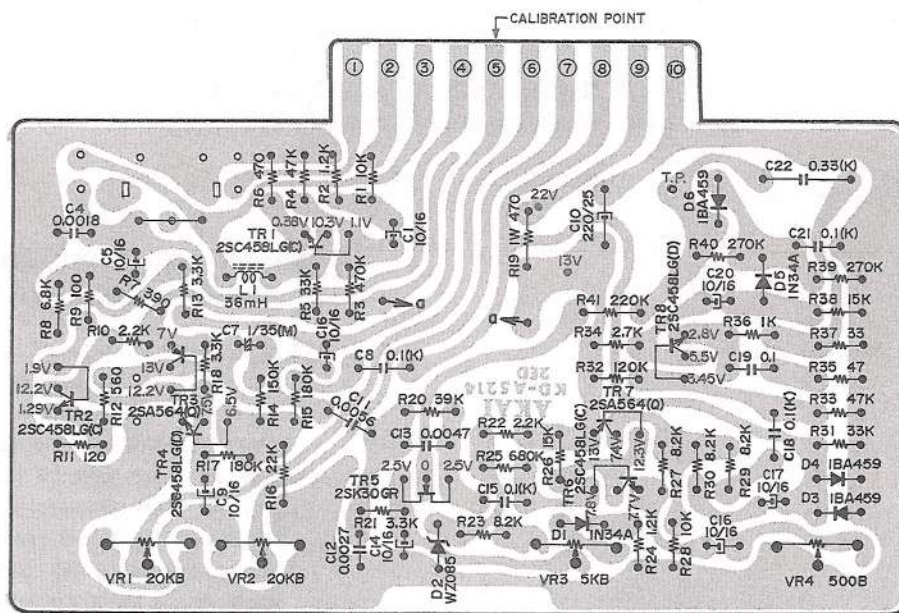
REC. DOLBY AMP. P.C. BOARD KD-A5214 (REVERSE SIDE)
